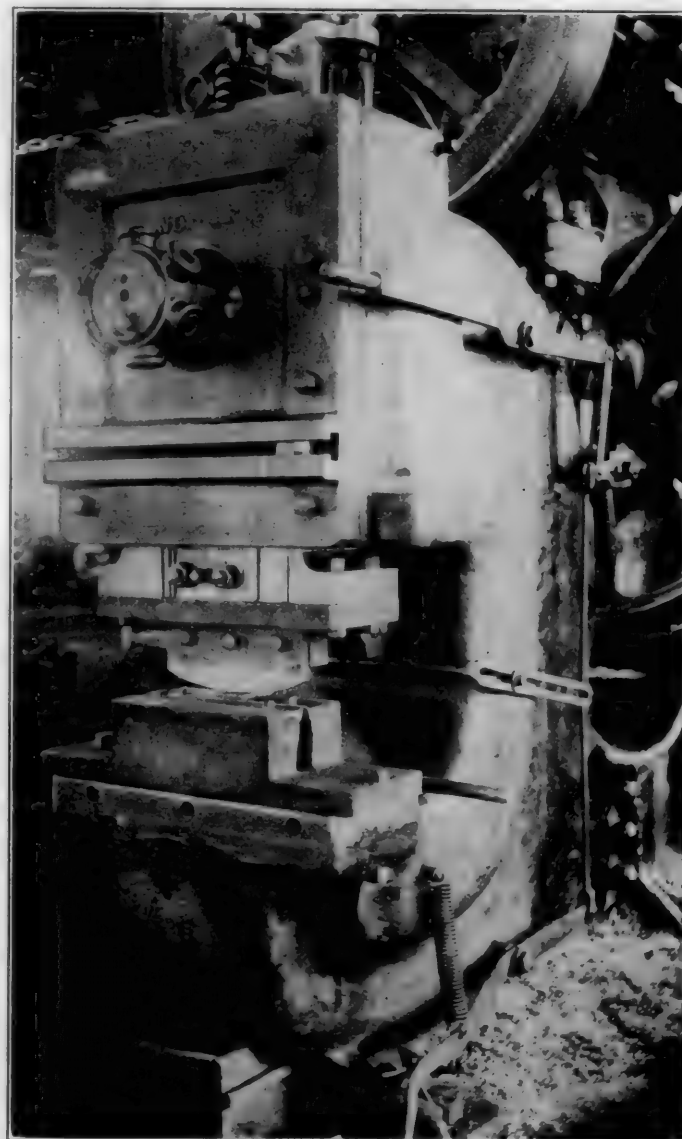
ATTACHMENT ON SHEAR FOR CUTTING BRAKESHOE KEYS TO SHAPE.
